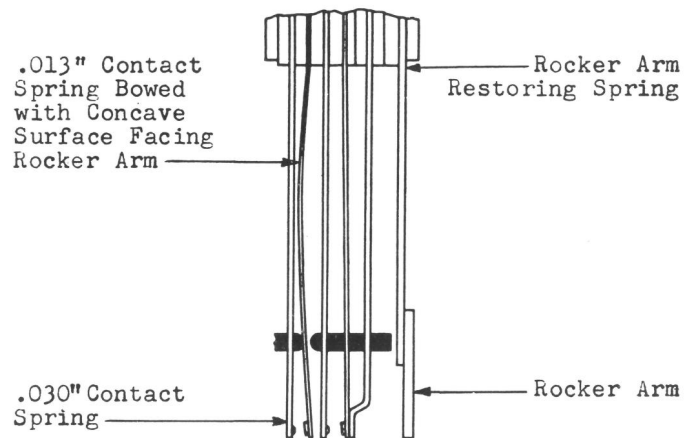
Position of Bowed Spring Before Final Tension Adjustment
